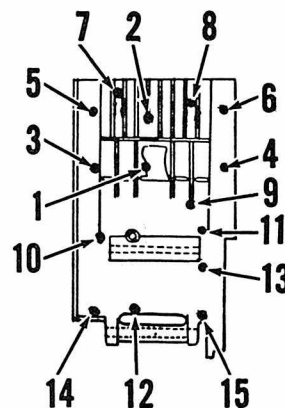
View of alignment marks on pressure plate and hub.
